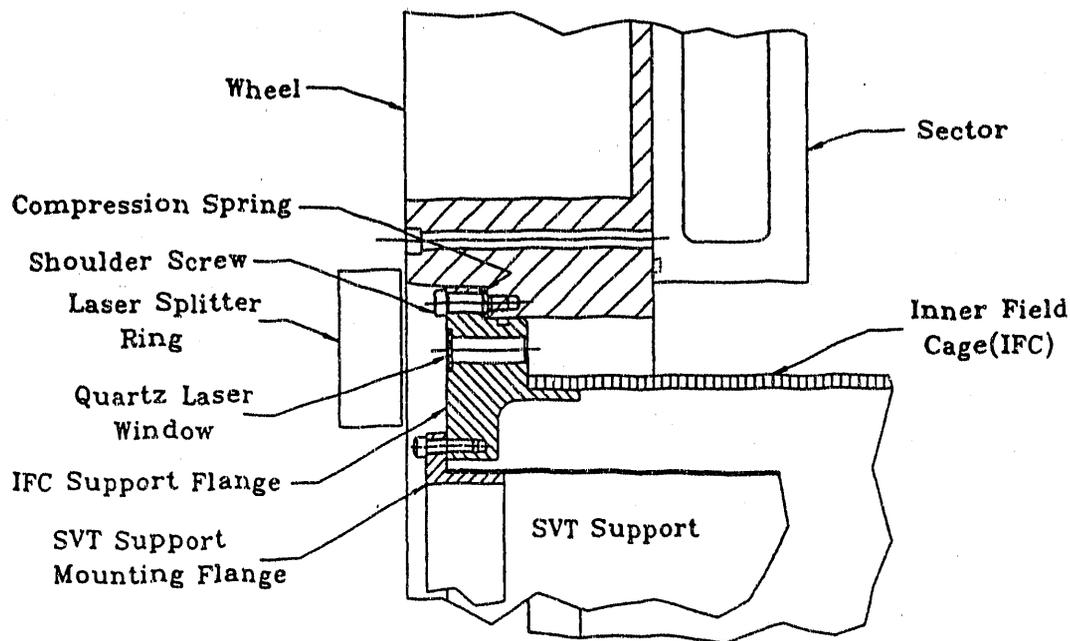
C-46 Inner field cage and SVT support mounting to the west end of the end cap wheel.
